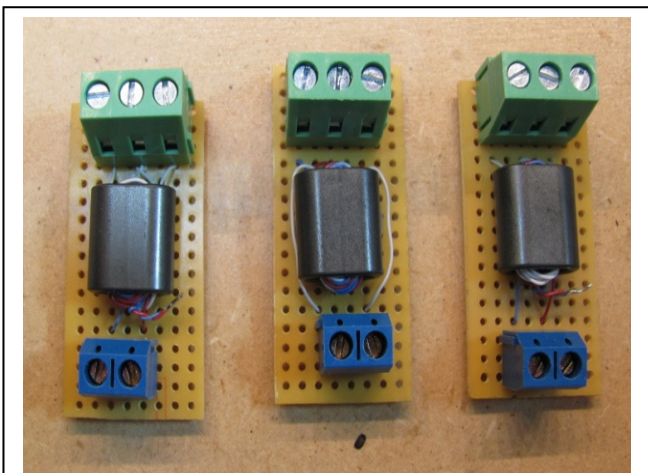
The matching transformers mounted on perfboard with terminal connectors for easy hookup
